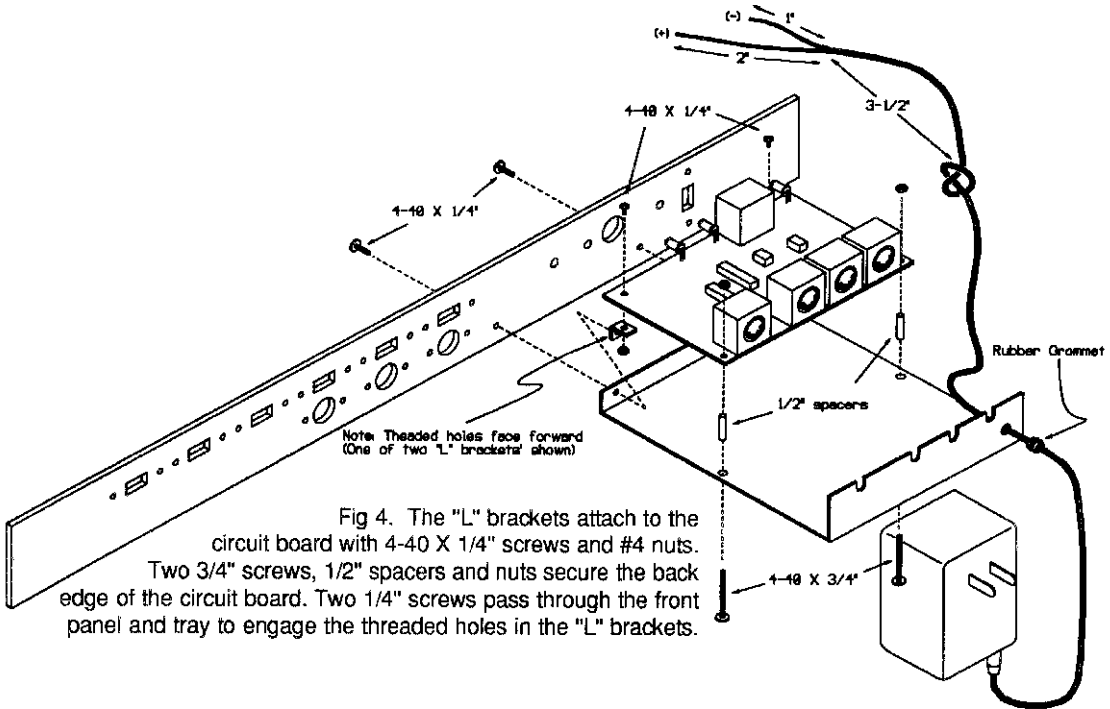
The "L" brackets attach to the circuit board with 4-40 X 1/4" screws and #4 nuts. Two 3/4" screws, 1/2" spacers and nuts secure the back edge of the circuit board. Two 1/4" screws pass through the front panel and tray to engage the threaded holes in the "L" brackets.
